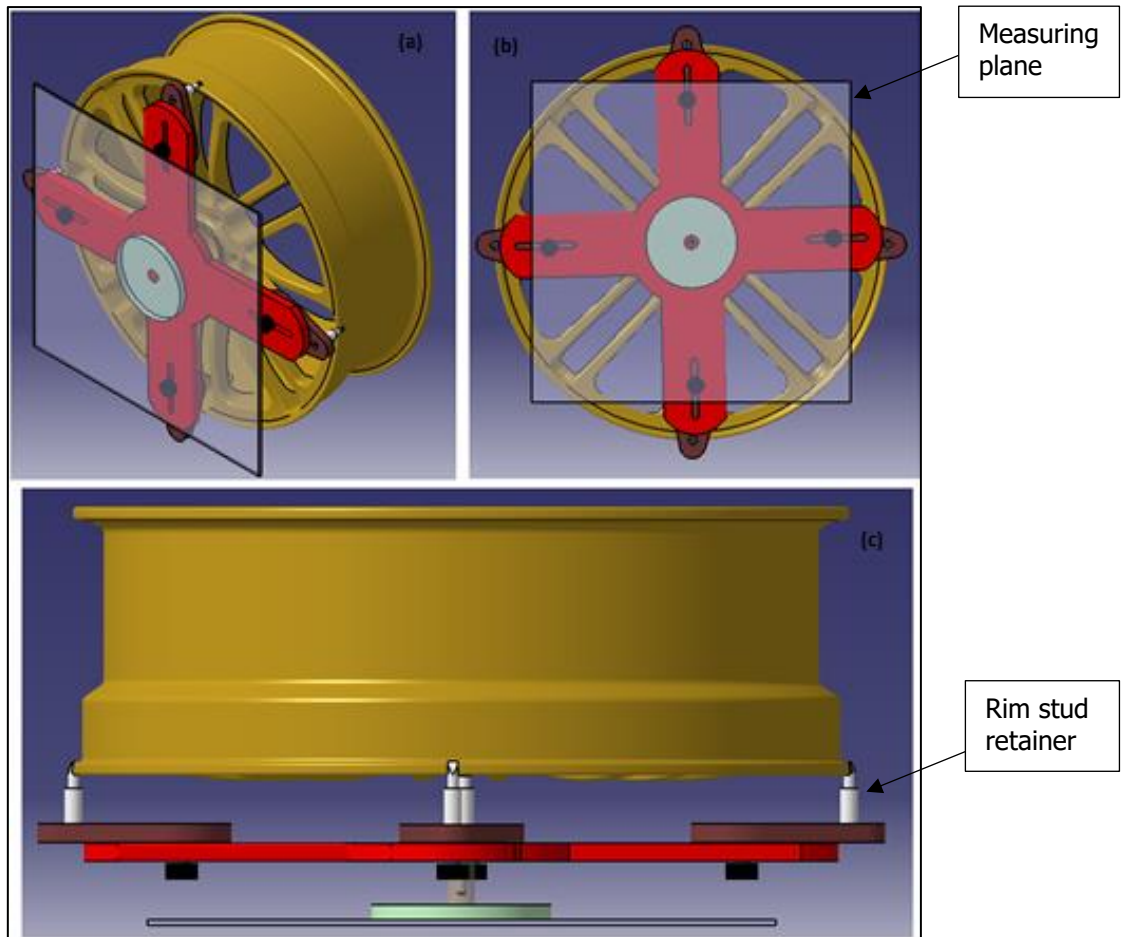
wheel clamp with wheel rim (a) isometric view; (b) front view; (c) top view.
